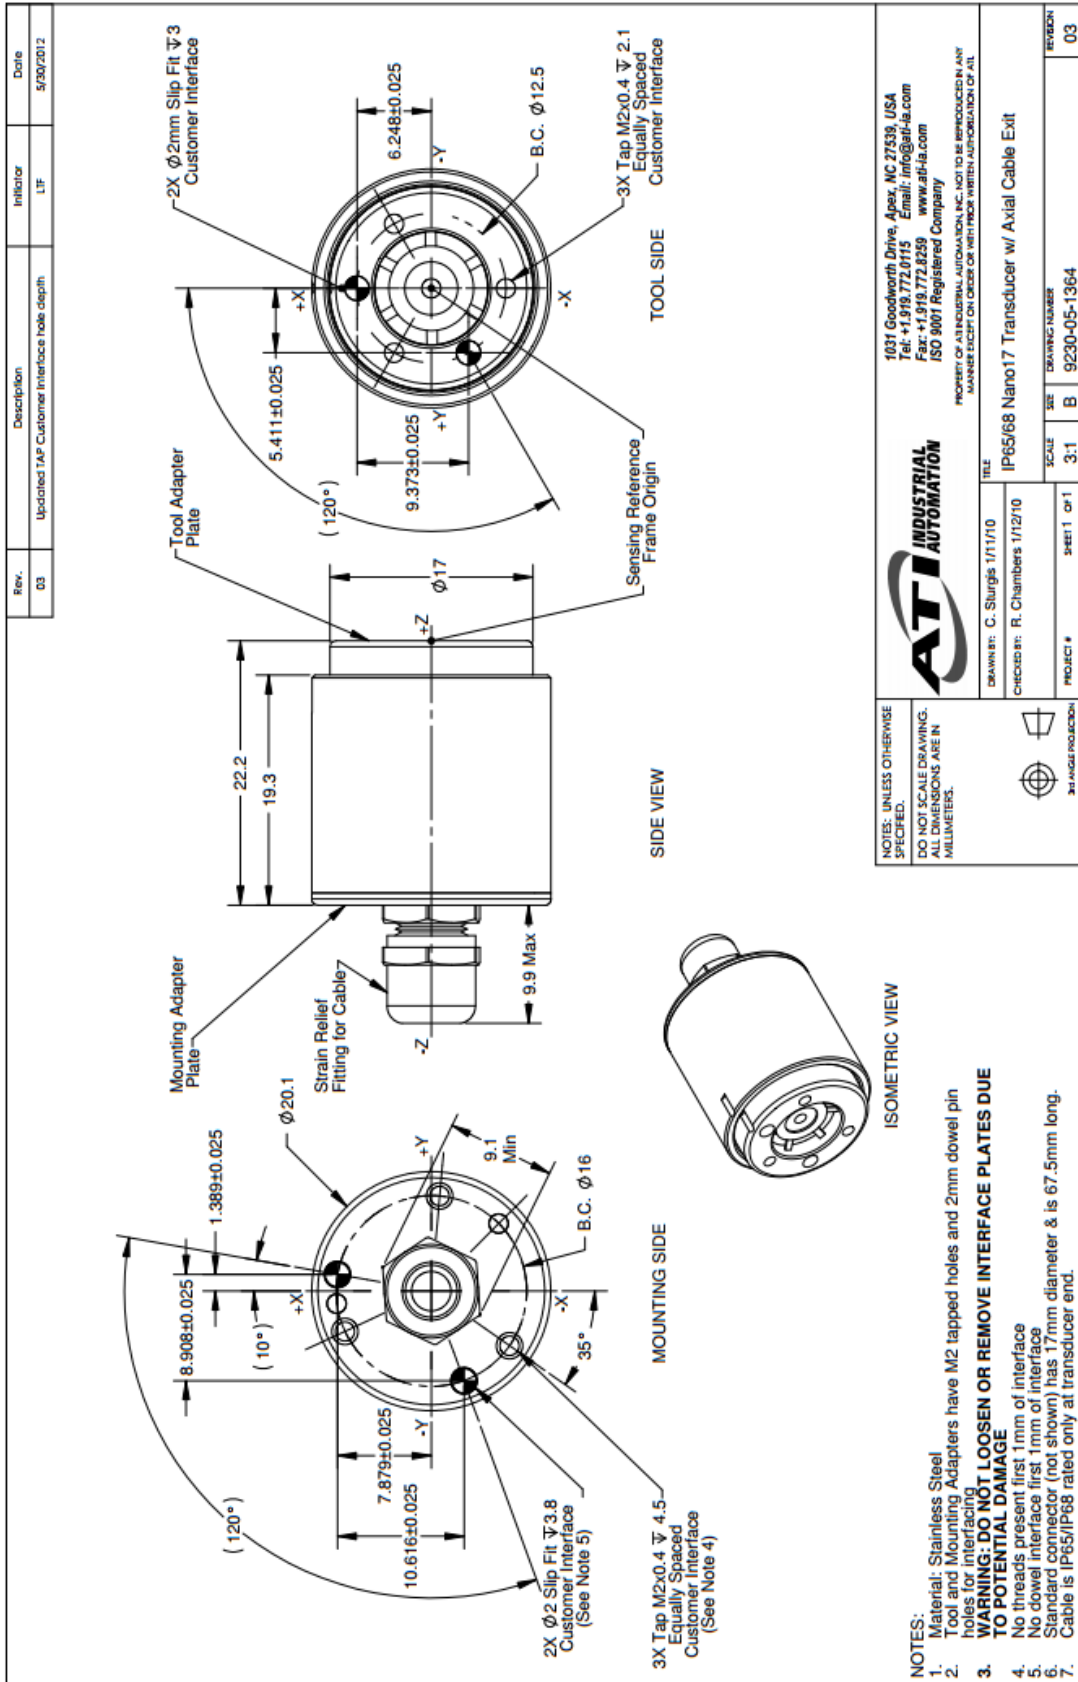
ATI NANO17 IP65/IP68 Transducer with Axial Cable Exit [56]
